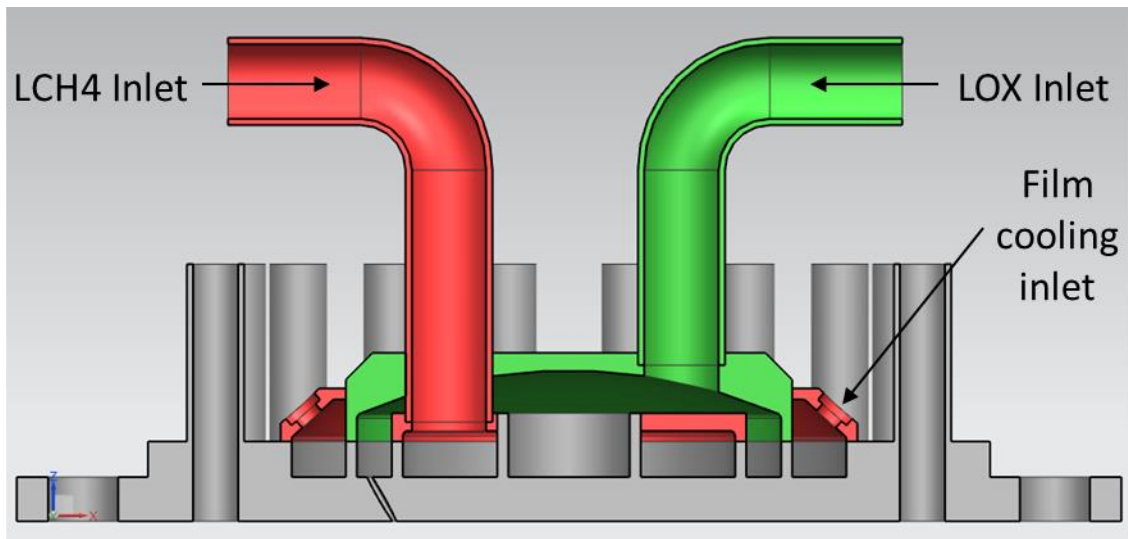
Cross sectional view of impinging injector showing manifold distribution
